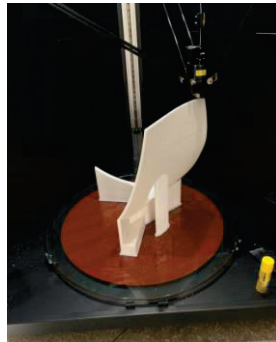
3-D printer to fabricate real scale VV model.
